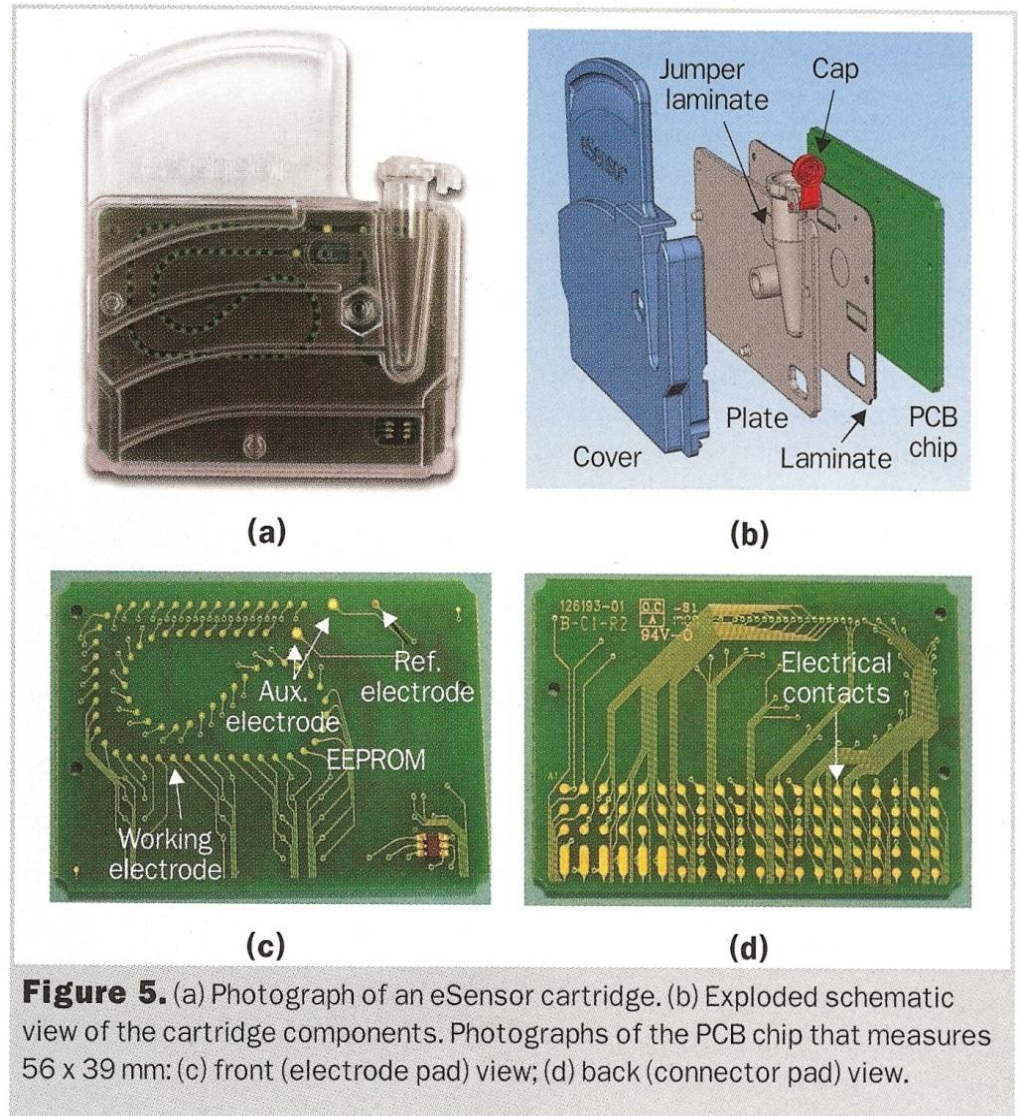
(a) Photograph of an eSensor cartridge. (b) Exploded schematic view of the cartridge components. Photographs of the PCB chip that measures 56 x 39 mm: (c) front (electrode pad) view; (d) back (connector pad) view.
